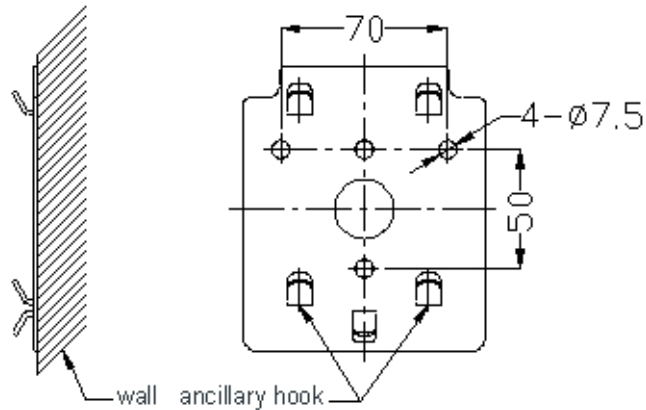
Dimension of the installing bottom board of the Wall Bracket for Outdoor Dome Camera
